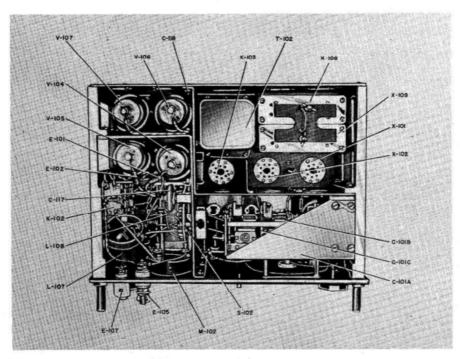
Transmitter Unit — Top Open View (older model shown; see note for Fig. 1)
